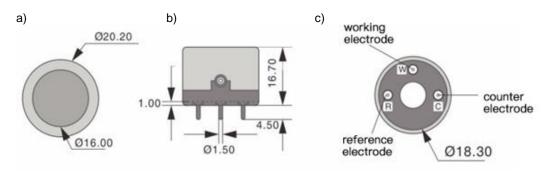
Mechanical dimensions in mm a) top view b) projection view c) bottom view
